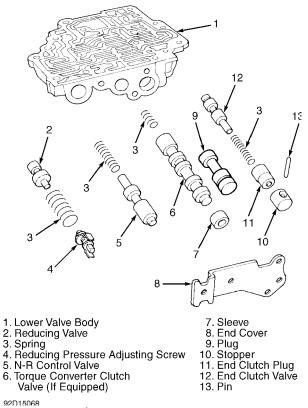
Exploded View of Lower Valve Body Components Courtesy of Mitsubishi Motor Sales of America.
